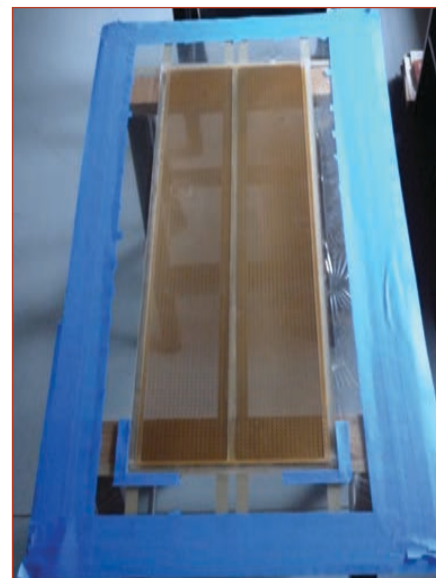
The masking tape has been removed and the tape locators are in place in preparation for the final gluing step.
